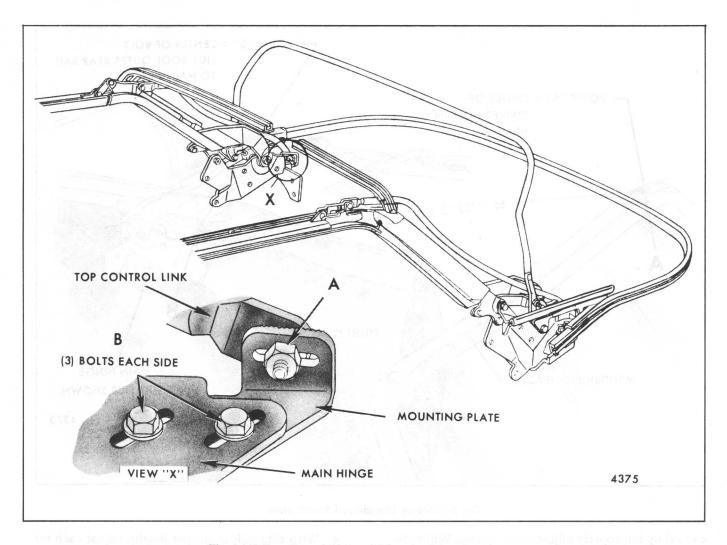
Top Control Link and Mounting Plate Attachment
